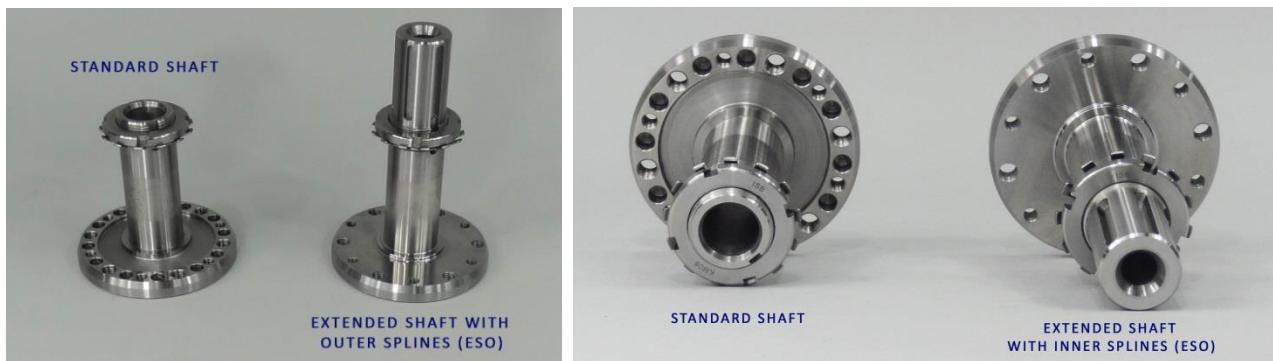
Standard motor shaft vs. extended shaft with outer splines (ESO)
